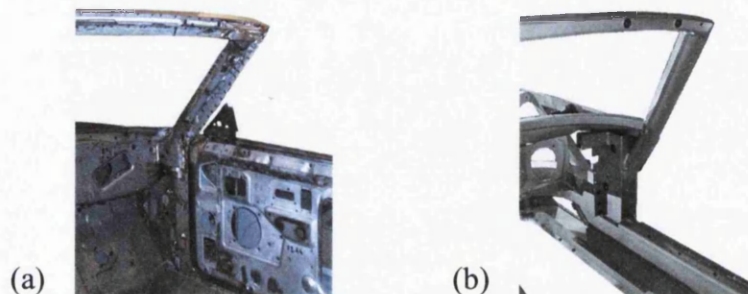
Typical A-pillar designs using (a) Steel extrusions; (b) Aluminium extrusions
